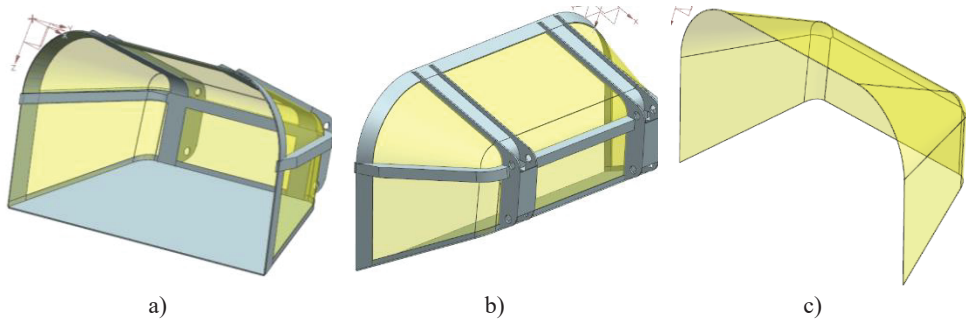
Scheme of the design of the bucket with carbon fiber inserts: front view (a), rear (b) and side (c).
